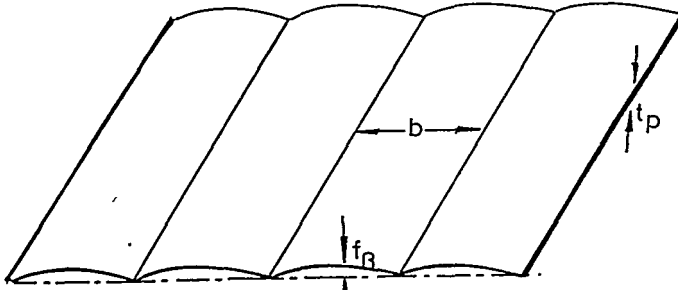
Geometry of Butt Welded Plates without Constrained Edges [5]
